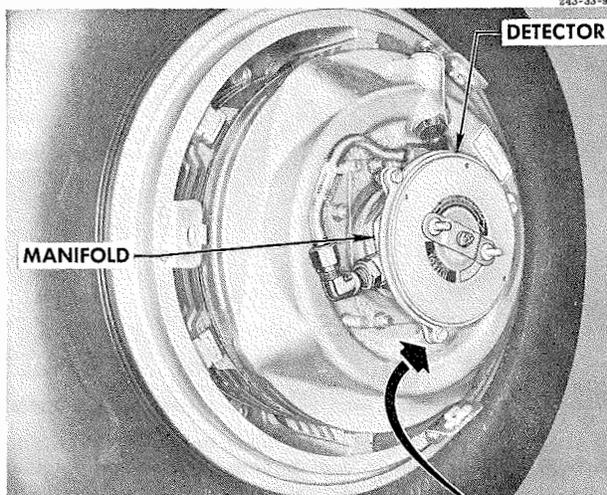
Installing General Main Gear Wheel and Brake Assembly (Sheet 3 of 5)
